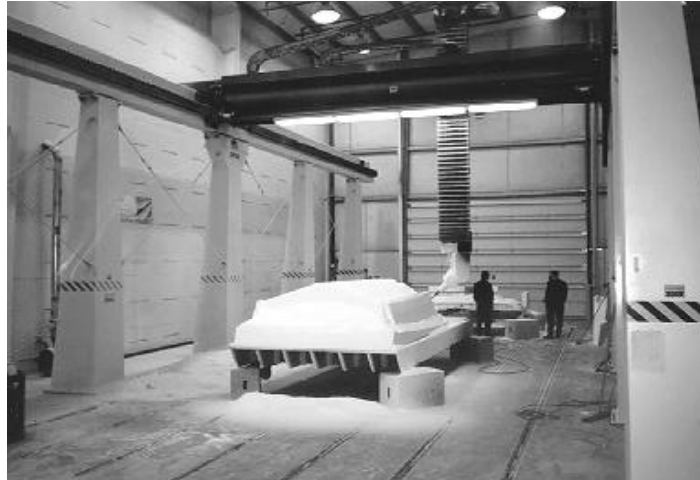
Gantry Robot Milling a Boat Hull Mold
